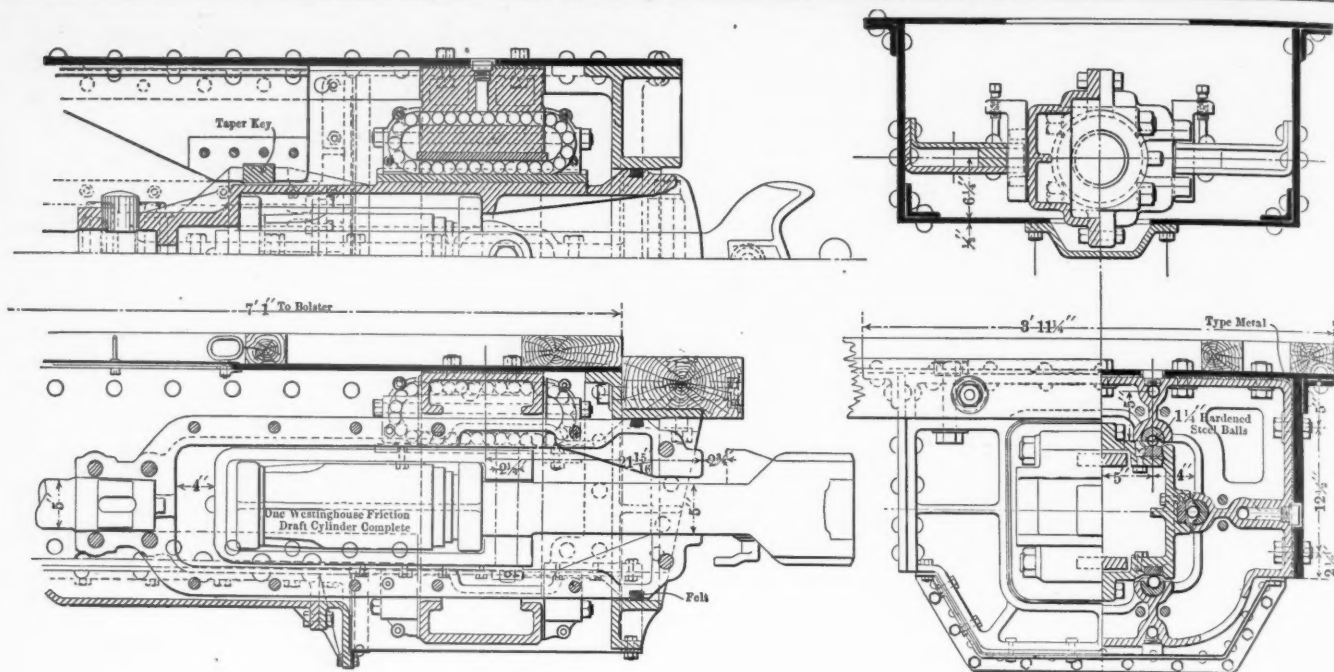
DRAFT GEAR HOUSING AND END OF CENTER SILL—PENNSYLVANIA R. R. DYNAMOMETER CAR.
